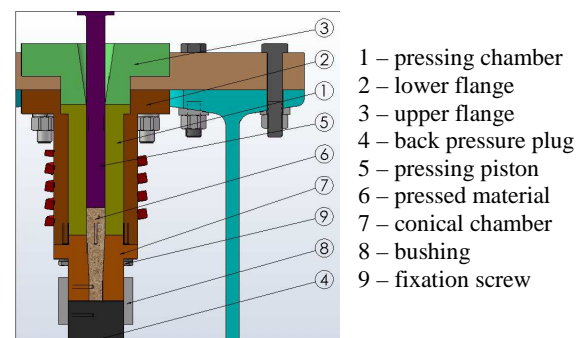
Cross-section of pressing stand 3D model with conical shaped chamber
